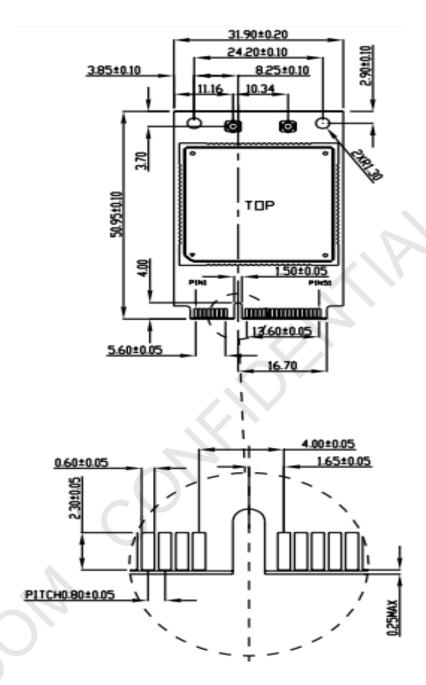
Dimensions of SIM5360-PCIE (Unit: mm Top view)
